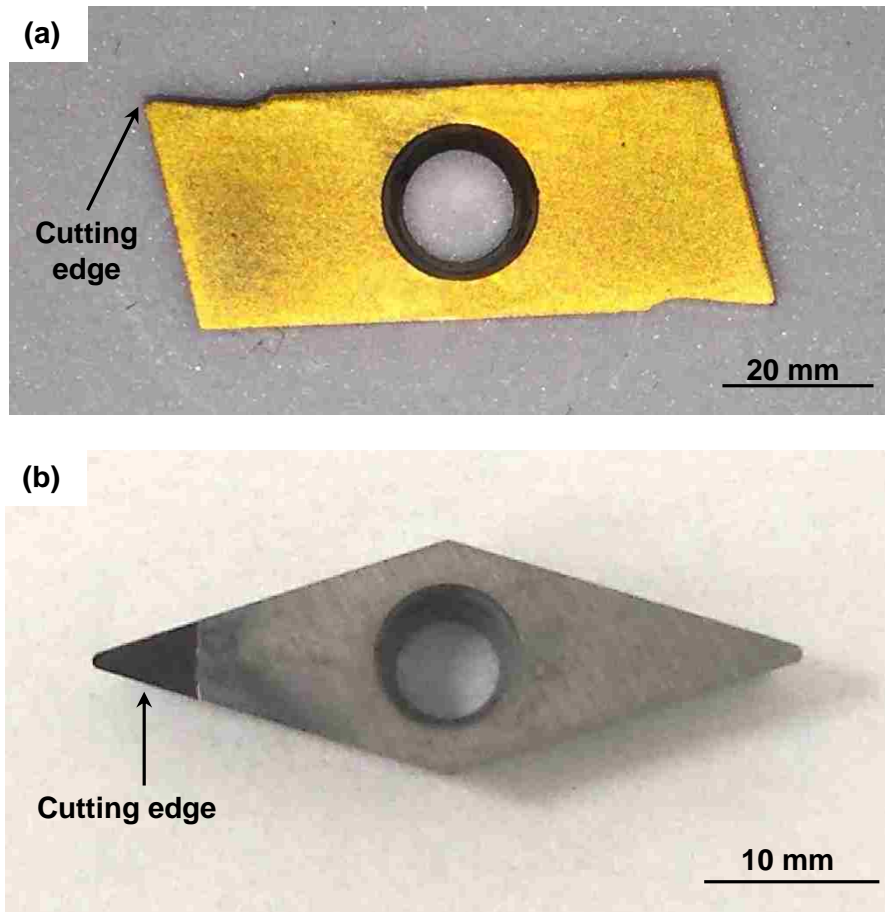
Cutting tools used for (a) in-situ experiments – uncoated tungsten carbide tool, (b) conventional machining – PCD tool
